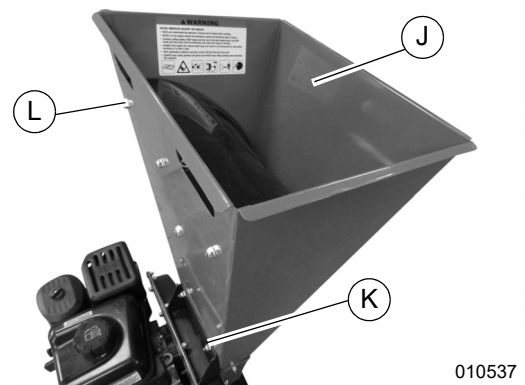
Securing Hammermill Housing/Shredder Hopper Assembly
